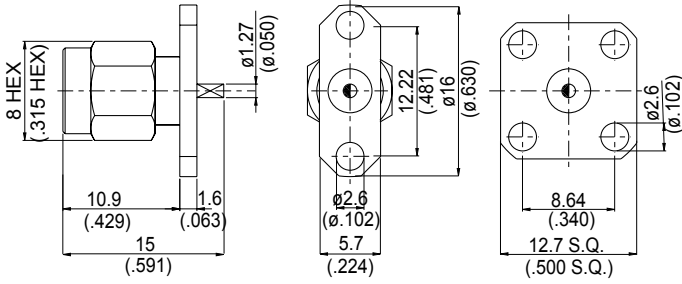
2-hole flange Fig. 1-2:square flange
